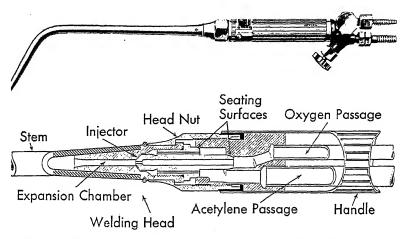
Typical low pressure welding blowpipe (Oxweld) and schematic cross-section.
